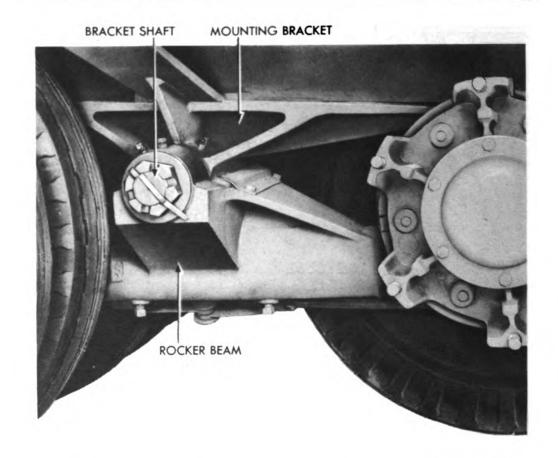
Rear Trunnion Mounting Bracket and Shaft
